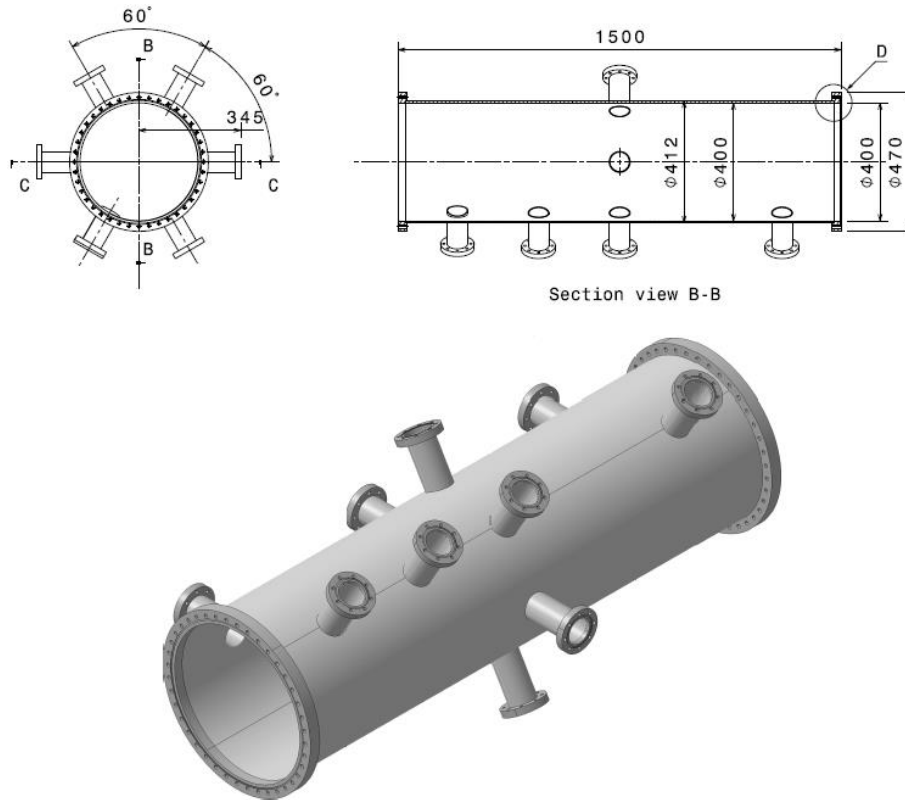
Sectional view and Isometric view of main chamber. All dimensions in mm.
